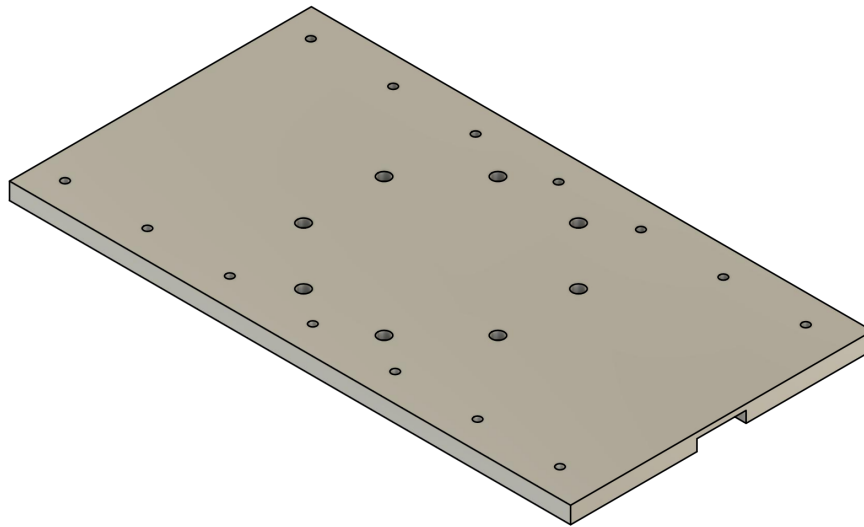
Drawing of the telescope-to-mount interface plate, machined out of aluminum to minimize weight. The six center holes align with a similar pattern on top of the mount, while the fourteen holes on the side allow the telescope to be offset by ± 3 inches along the optical axis. The channel on the bottom is used to route power and data cables through the mount to the detector and guide cameras.
